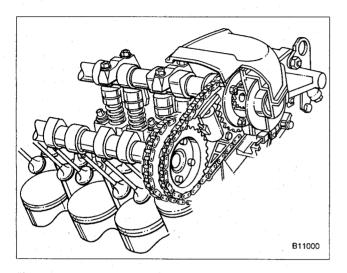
M52 twin-cam, 4-valve-per-cylinder engine with hydraulic lifters.
